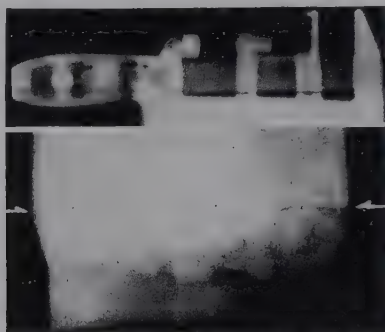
Radiographs of wrench and defective weld, with γ -rays.
